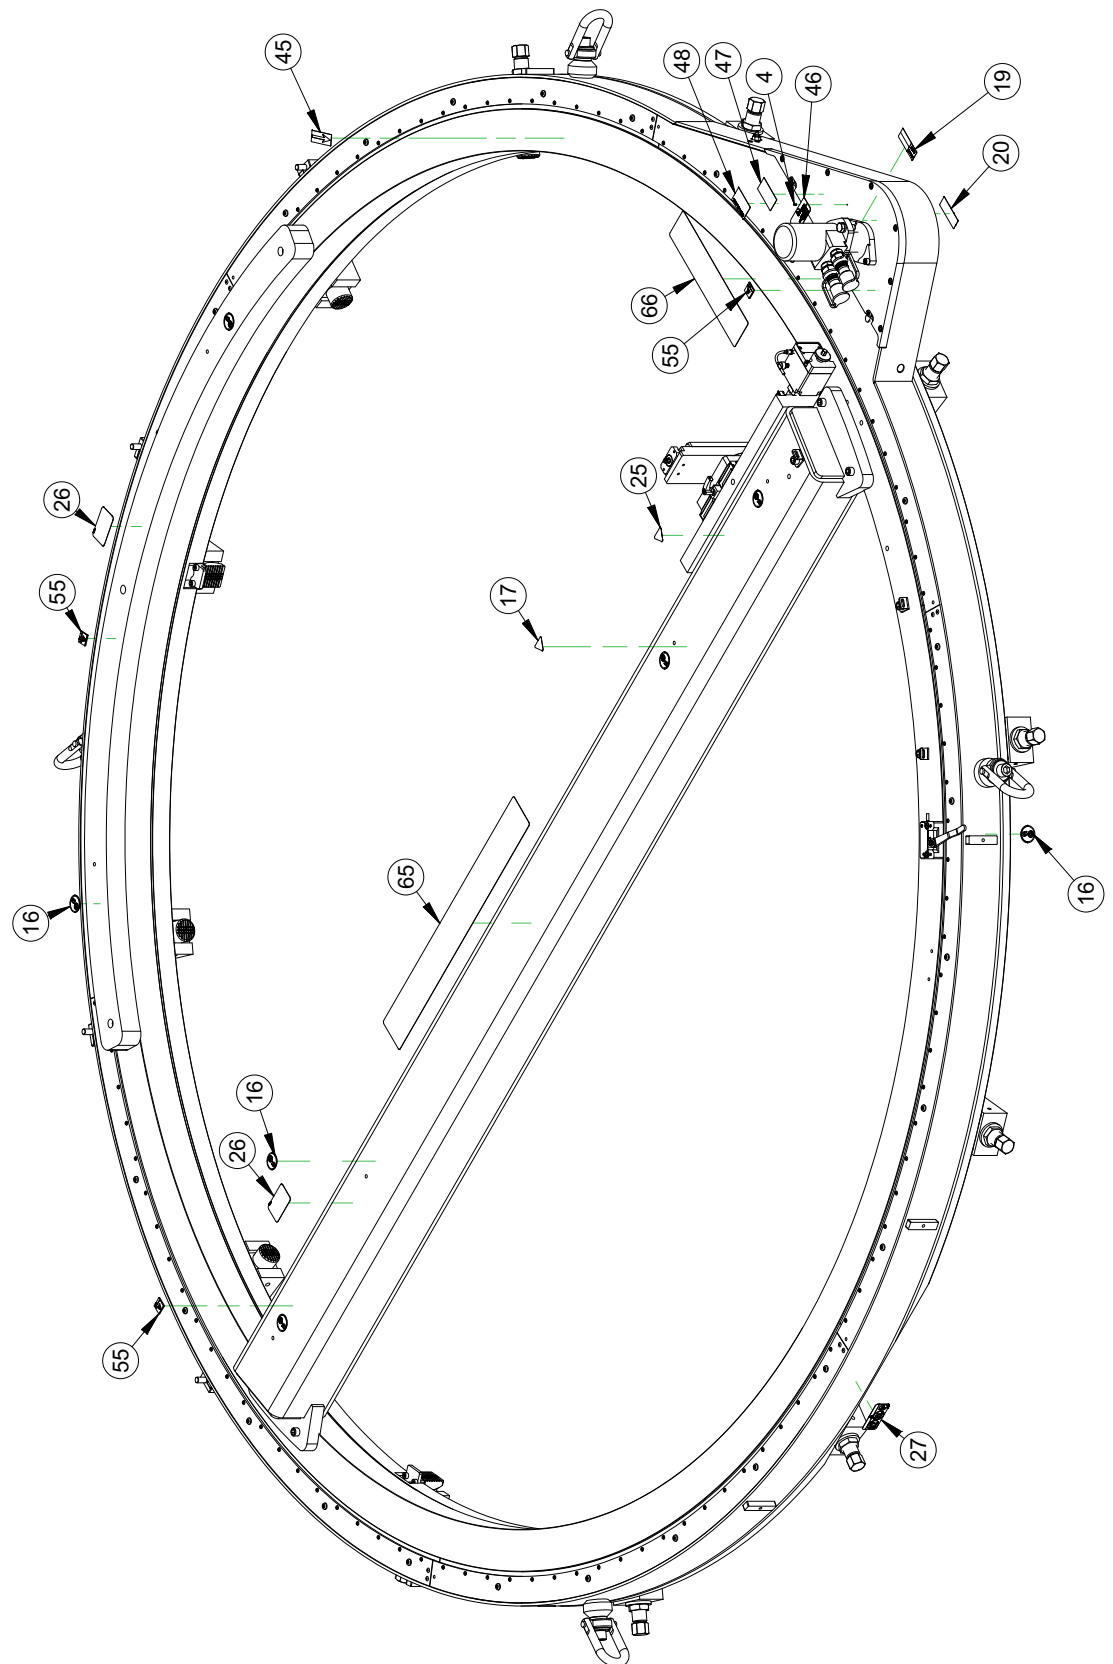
ODF120 SPEED FACER LABEL LOCATIONS (P/N 89210)
